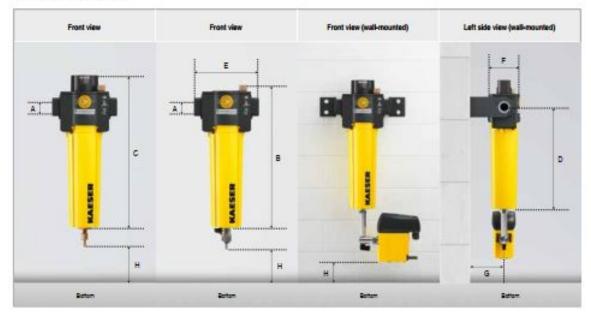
Cyclone separator dimensional drawings. Model F46KC [KAESER COMPRESSORS F, no date]
